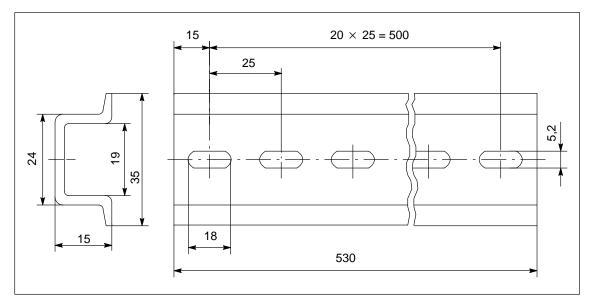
Dimension Drawing of the 530 mm Standard Rail
